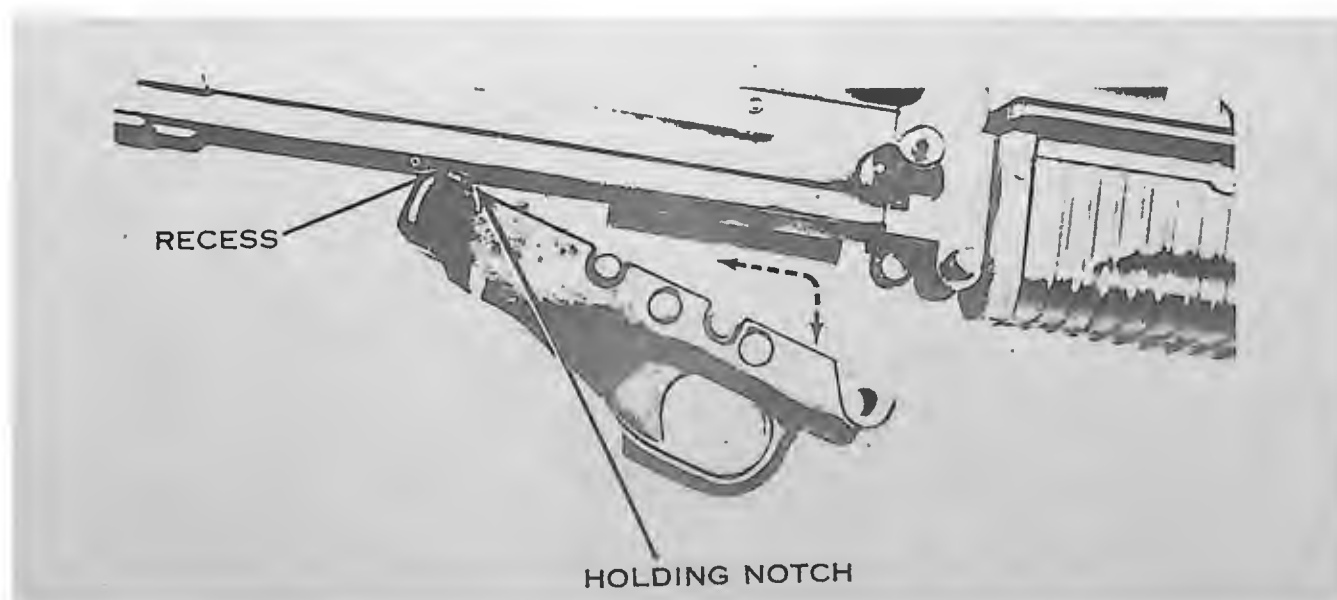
REMOVING THE TRIGGER HOUSING GROUP
